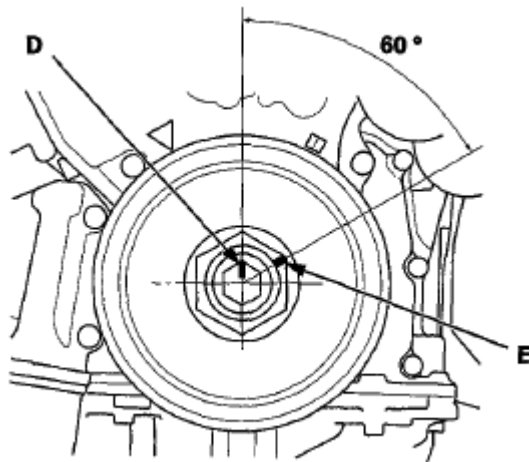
Tightening Crankshaft Pulley Bolt 60° Angle
